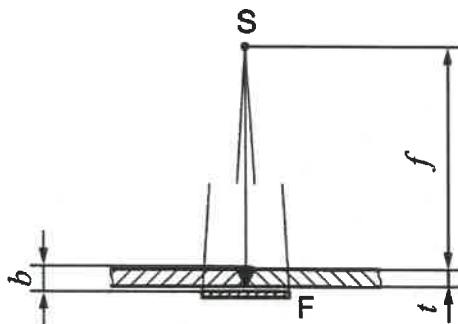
; Plane welds and single wall penetration / Bild 1, ebene Schweißnähte und einwandige Durchstrahlung
